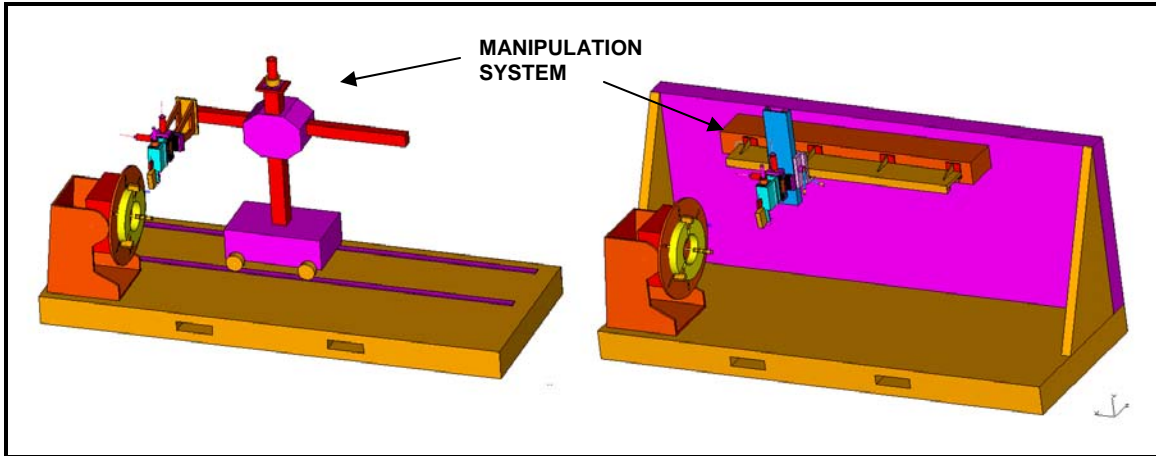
Examples of Weld Head Manipulation Systems.
